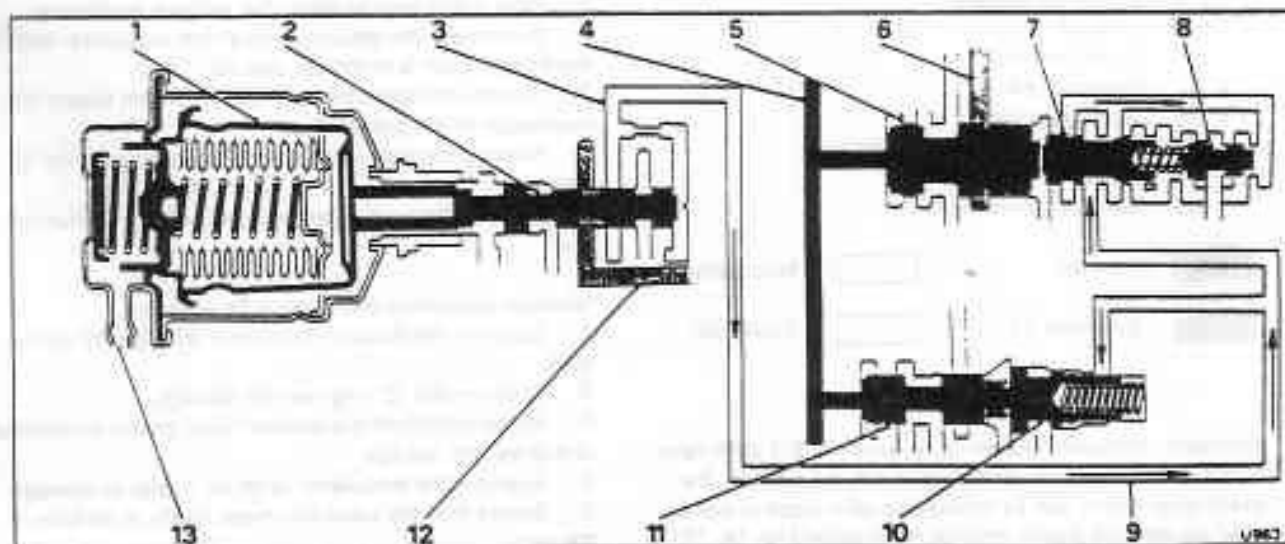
Vacuum modulator and valve showing modulator pressure
